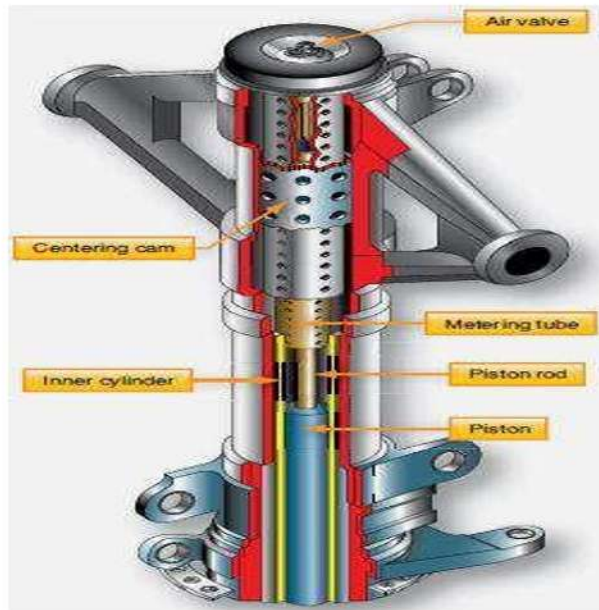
Some landing gear shock struts use an internal metering tube rather than a metering pin to control the flow of fluid from the bottom cylinder to the top cylinder.
